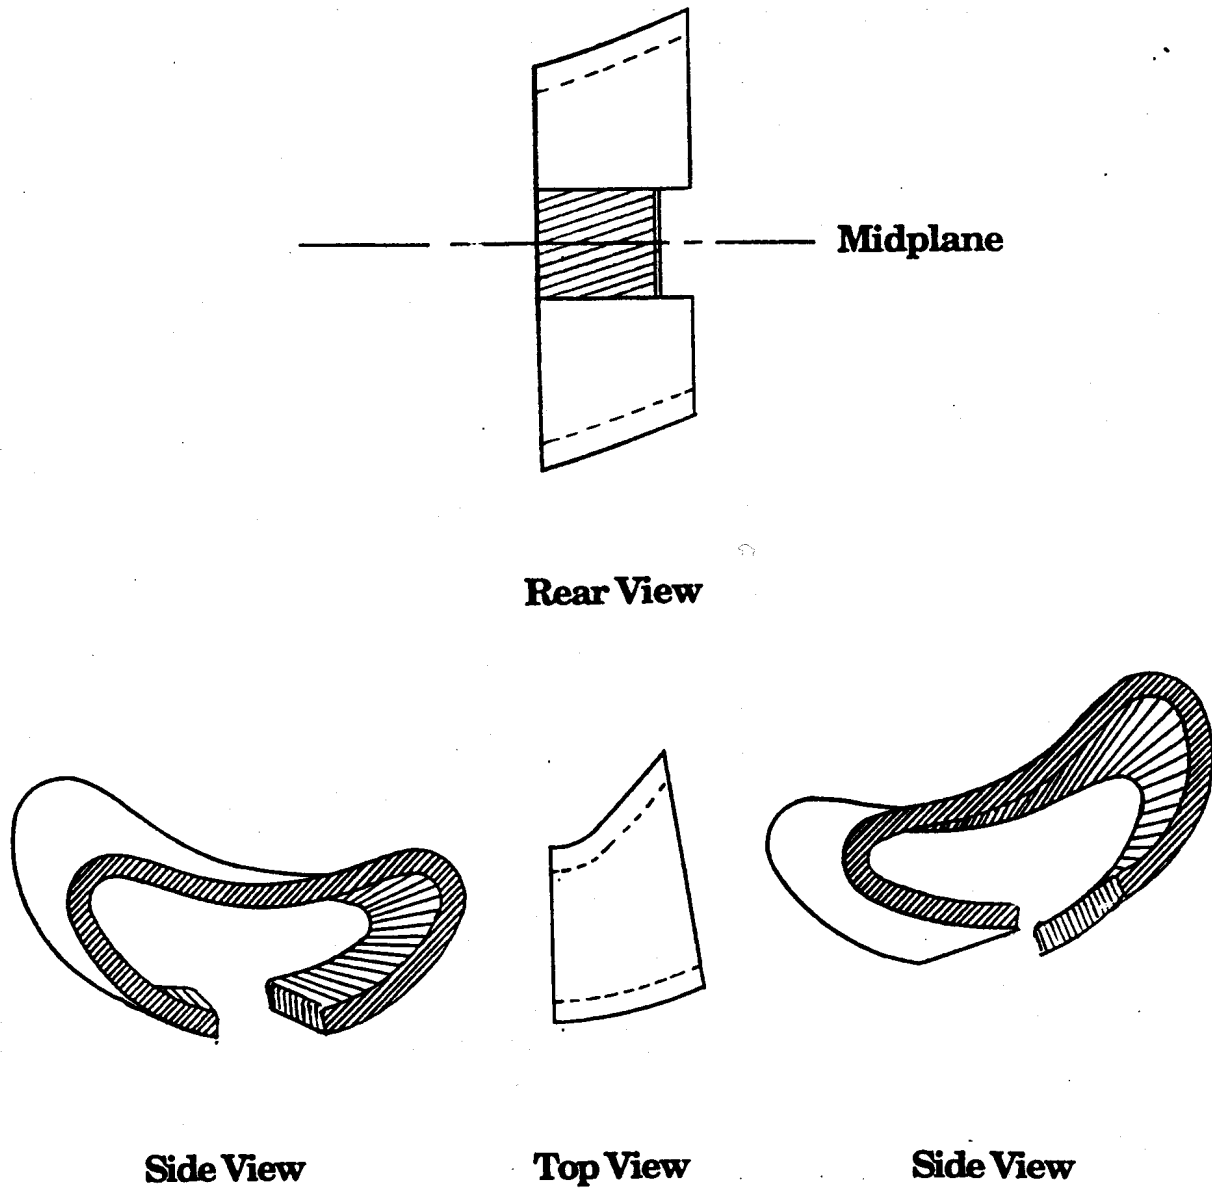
Blanket/shield module no. 1 shown with outer mid-plane part removed.
